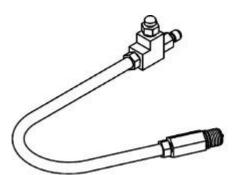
ADAPTER, PRESSURE PEP - 8116 Courtesy of CHRYSLER LLC
